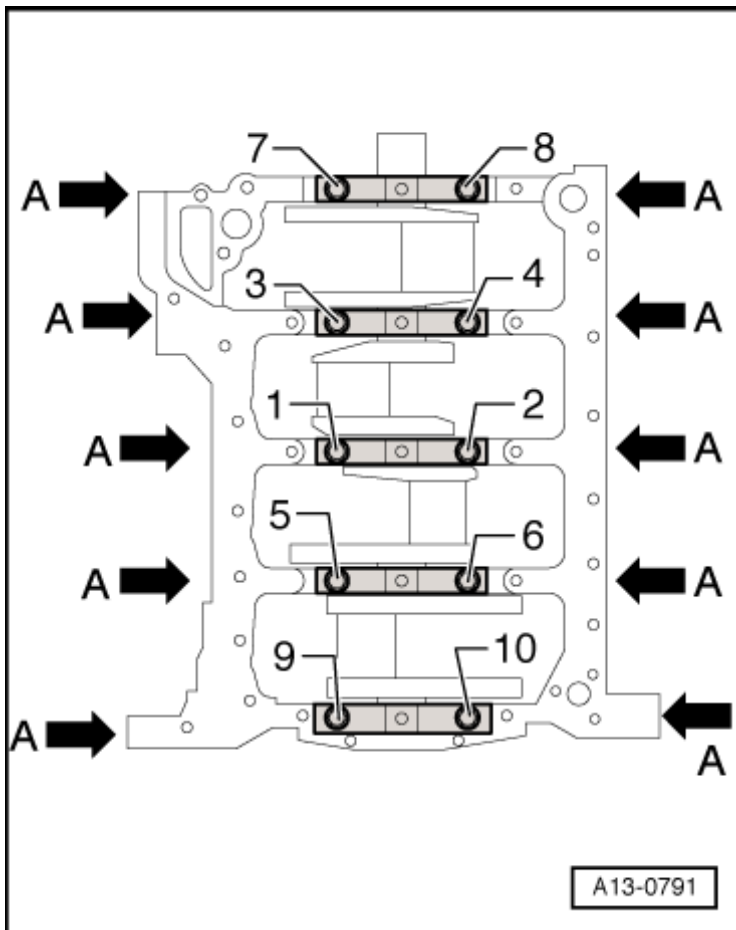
Identifying Crankshaft Bearing Cap, Installing
